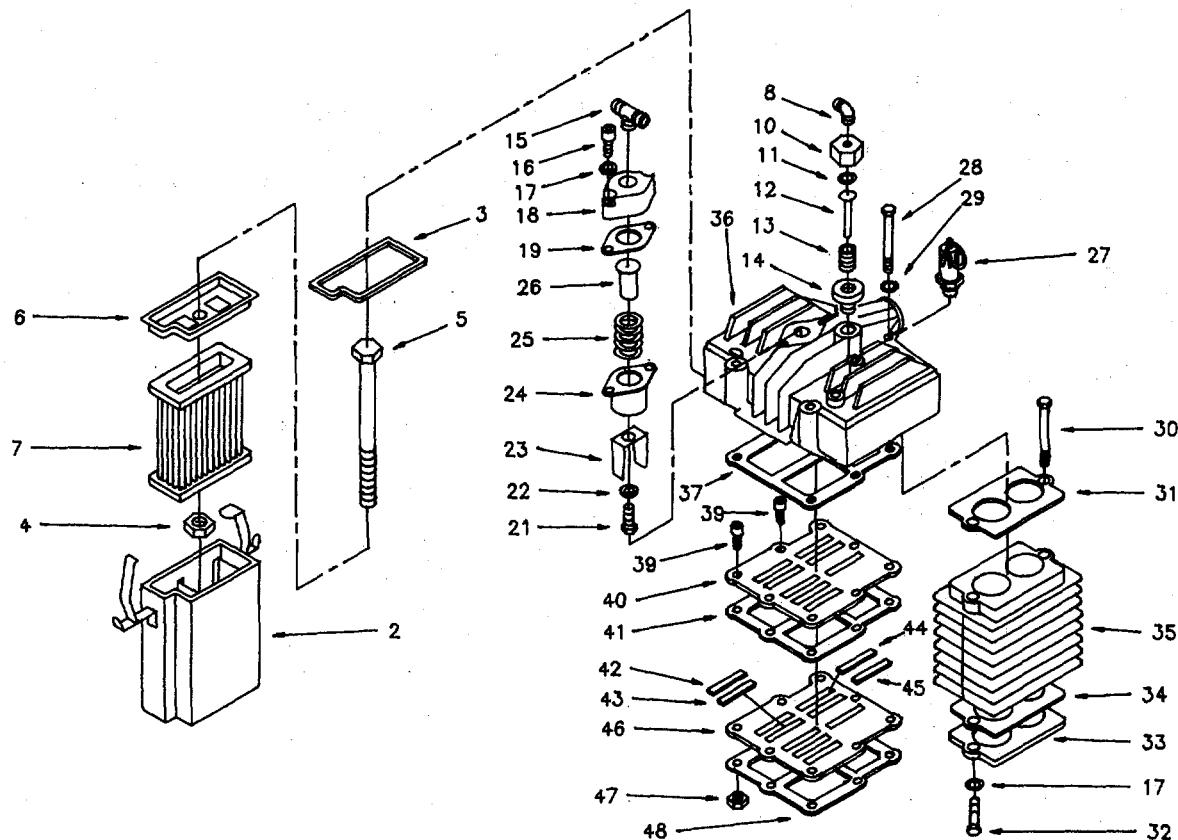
Cylinder Head, Valves, Head Unloaders, and Strainer Assembly
